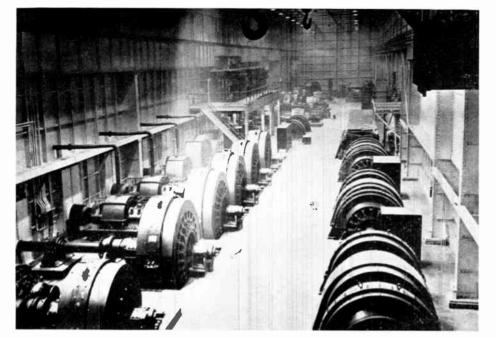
A hot-strip mill of 96-in. width installed during the year by Jones & Laughlin Steel Corp., Pittsburgh (Pa.). General view of motor room from finishing end
